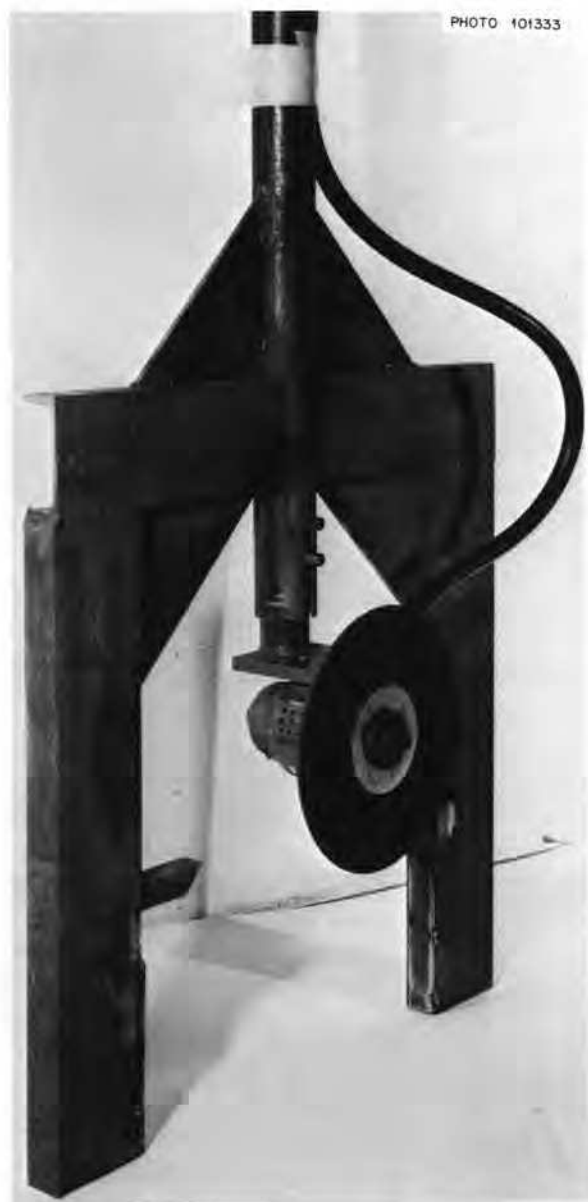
Abrasive cutoff tool for removing heat exchanger tube section.
